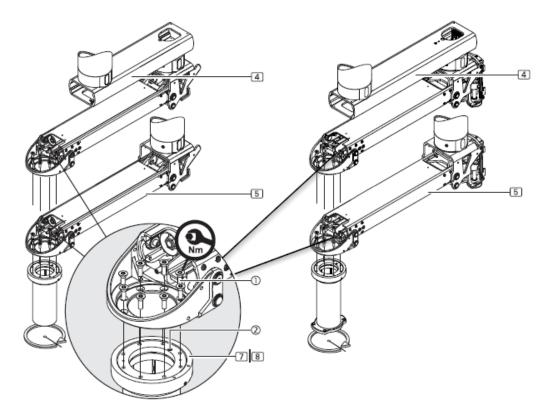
Assembly of drop tube on motorised and spring-loaded arms
